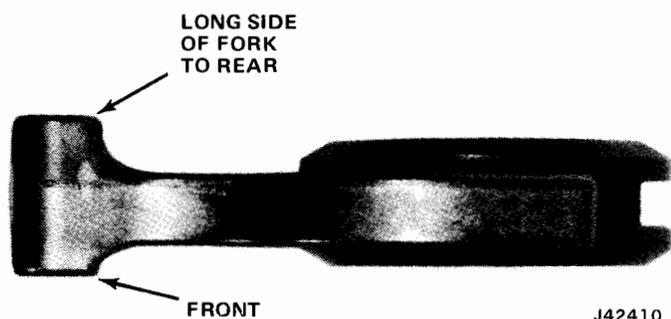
Shift Fork and Lockup Hub Assembly
